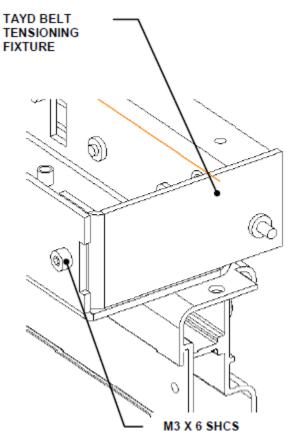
Transport Arm Y Drive Belt Tensioning Fixture
